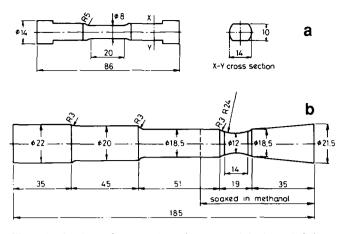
Specimens for (a) static torsion tests and (b) dynamic fatigue tests. Dimensions are in millimetres
